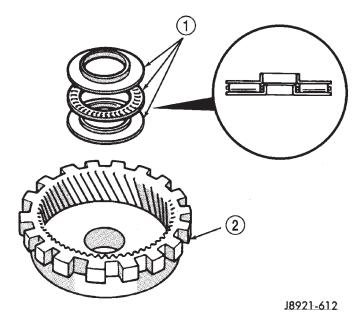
Removing/Installing Ring Gear Thrust Bearing And Races
